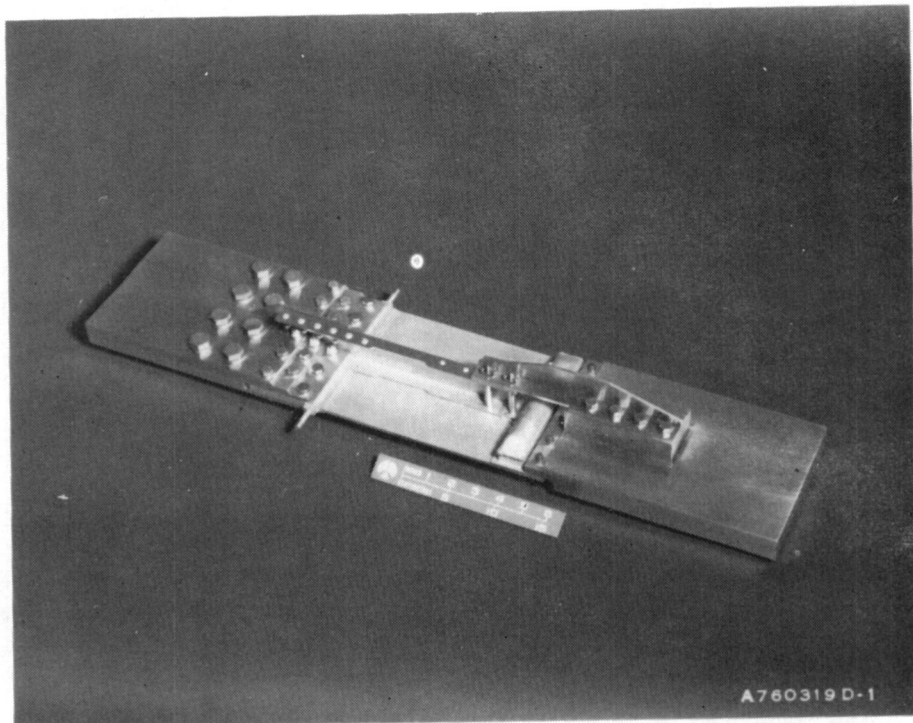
End Panel/Internal Stringer Termination Fatigue Specimen
